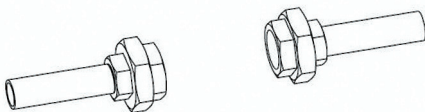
Meter Mounting Diagrammatic Sketch 3
